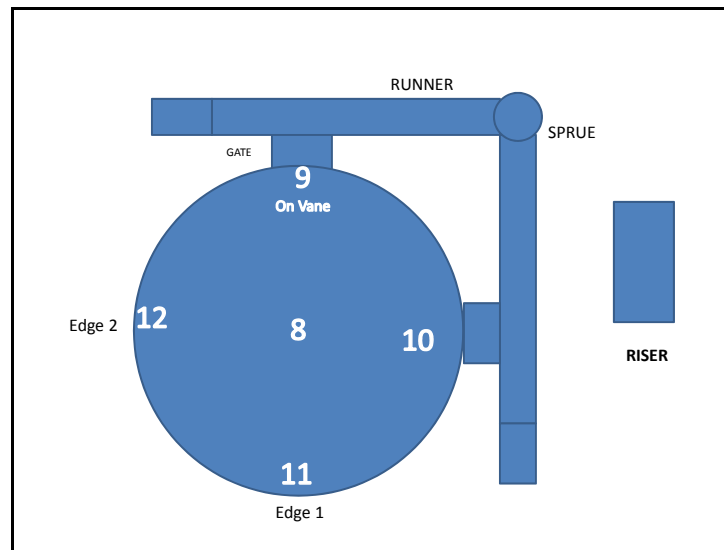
Sketch showing location of samples collected from the casting (Impeller).
